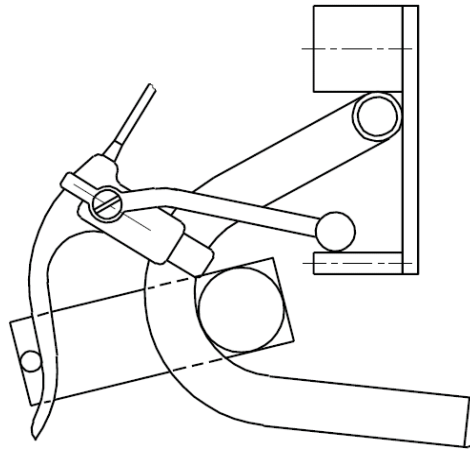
METHOD OF FITTING THE GAUGE TO THE BRAKE LEVER AND HANDLEBAR FOR TYPE C
